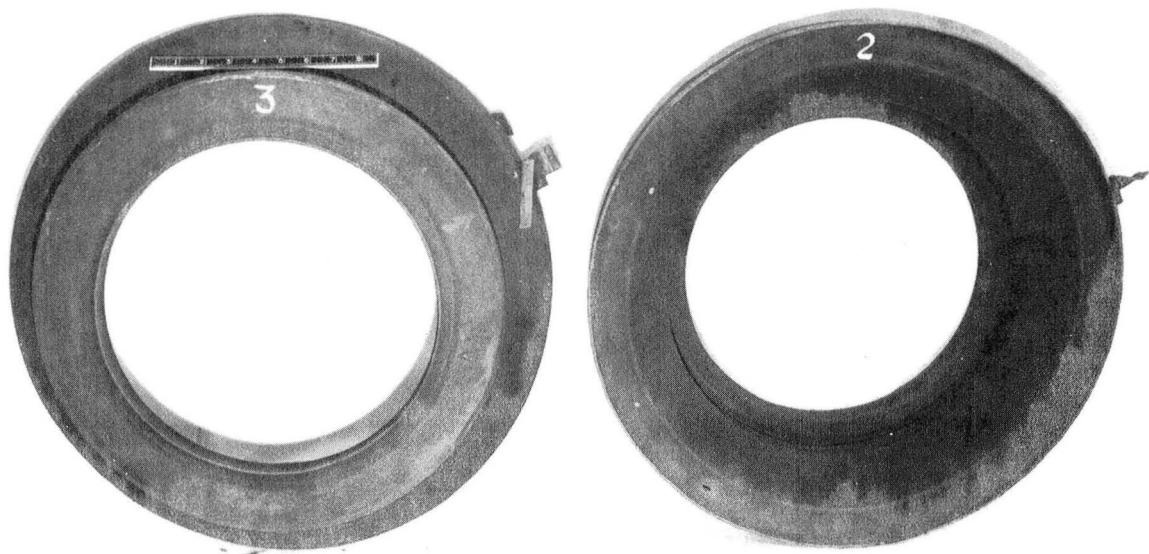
Front and Rear View of Seals 35S-3 (left) and 35S-2 (right)
